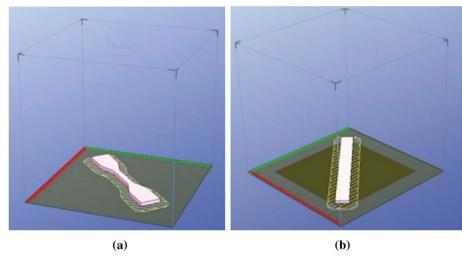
(a) Tensile and (b) flexural specimen design that used to be printed via FDM 3D printer [58].
